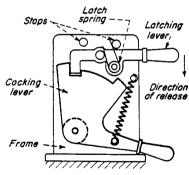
A latch and cocking lever is spring-loaded so that latch movement releases the cocking lever. The cocked position can be held indefinitely. Studs in the frame provide stops, pivots, or mounts for the springs.
